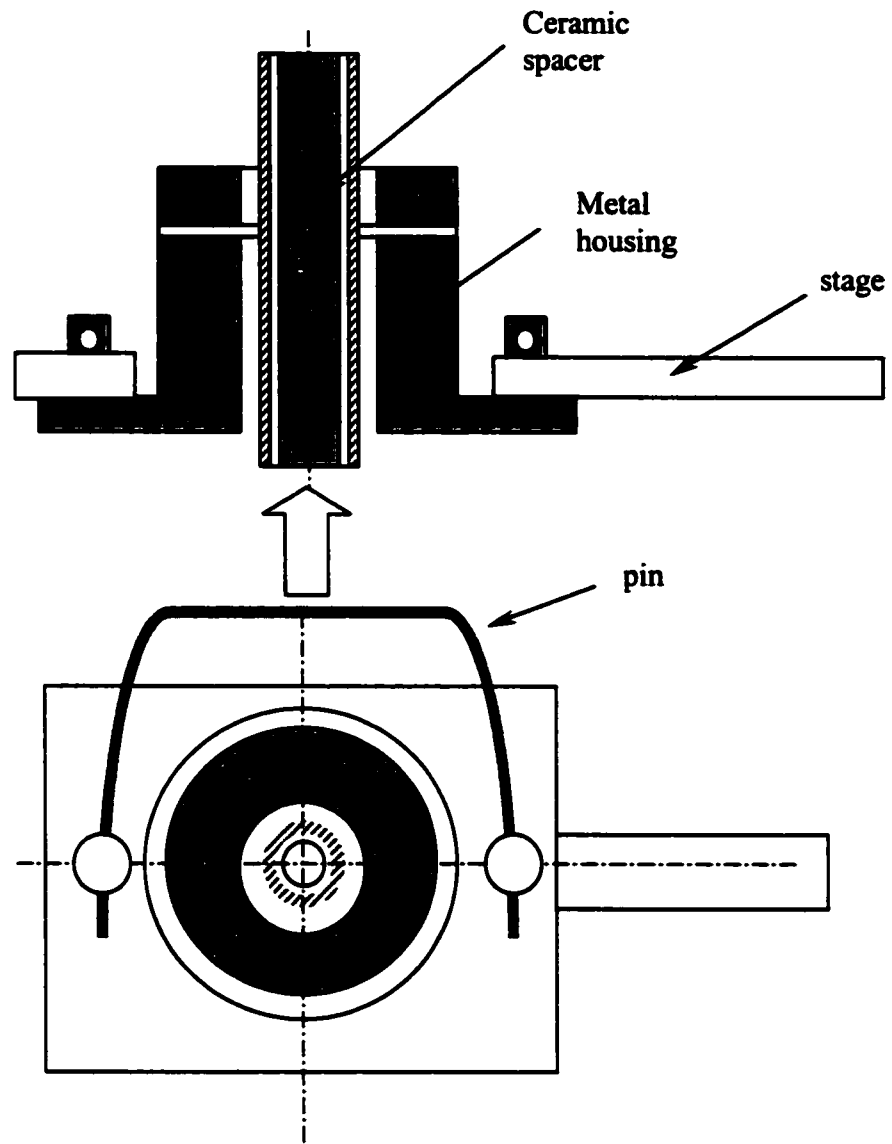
Mechanical clamp assembly designed to perform quench experiment by dropping sample/crucible into water.
